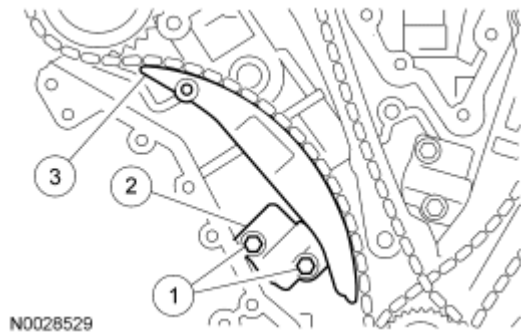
Identifying RH Timing Chain Tensioner Arm & Bolts
